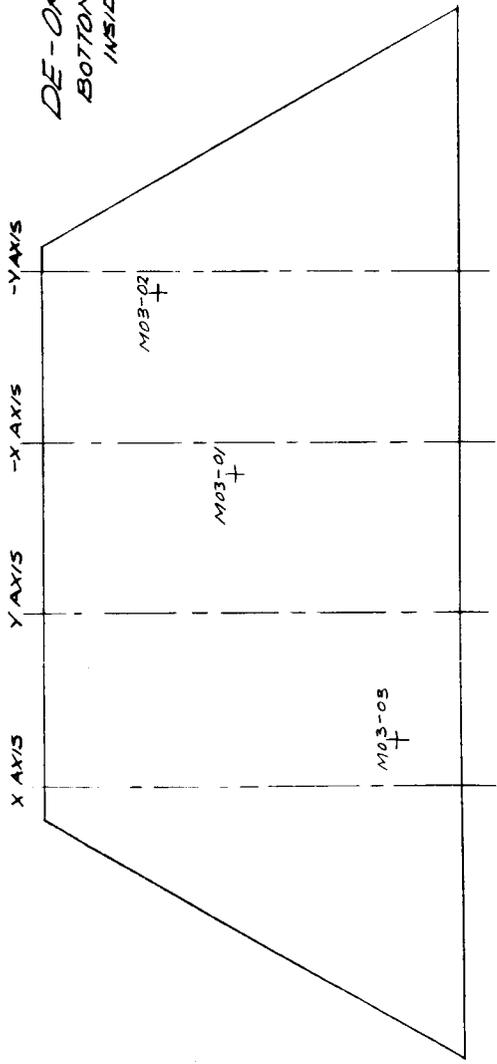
DE-ORBIT MOTOR CABLE HARNESS
